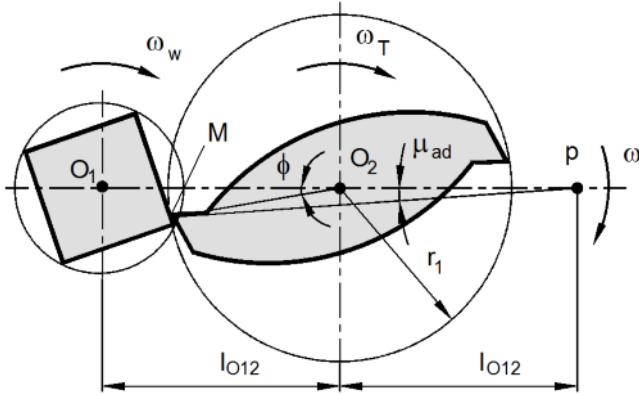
Model of machining a polygonal shaft on a lathe
